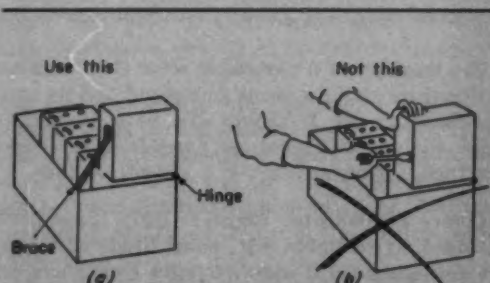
Method of bracing hinged assemblies and subassemblies during servicing. *a*. Without a brace such units must be hand-held, *b*.
